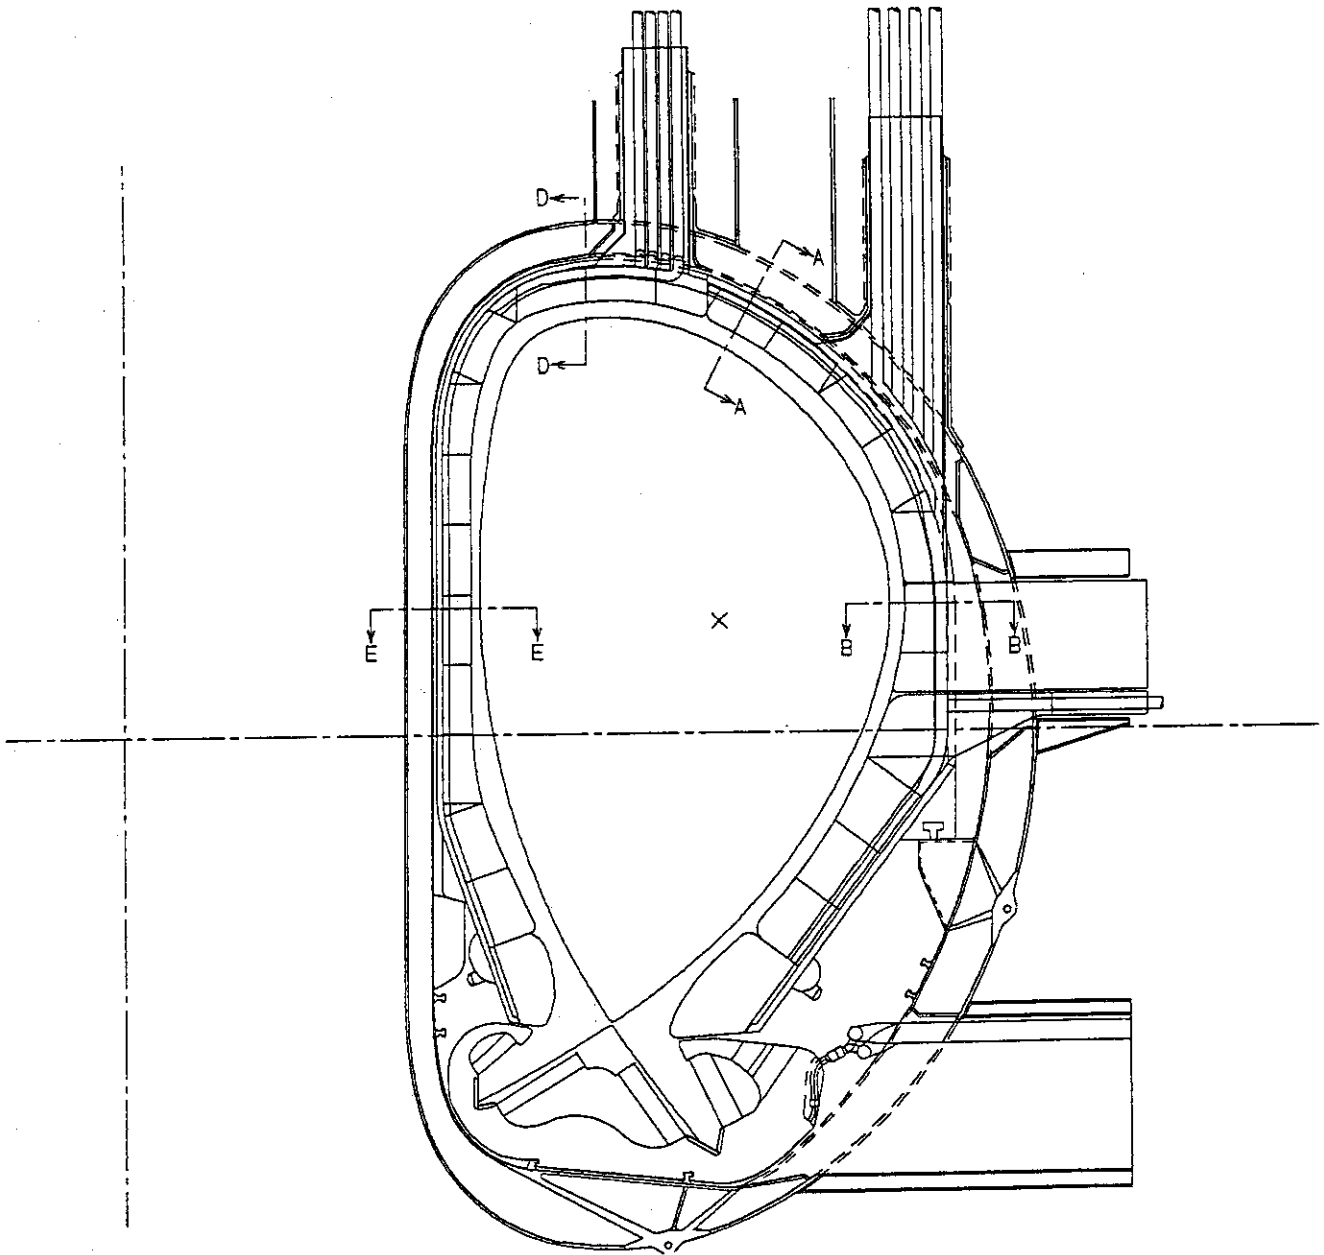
A lateral view of the shielding blanket. The blanket module is supported by the shelves extruding from the vacuum vessel.
